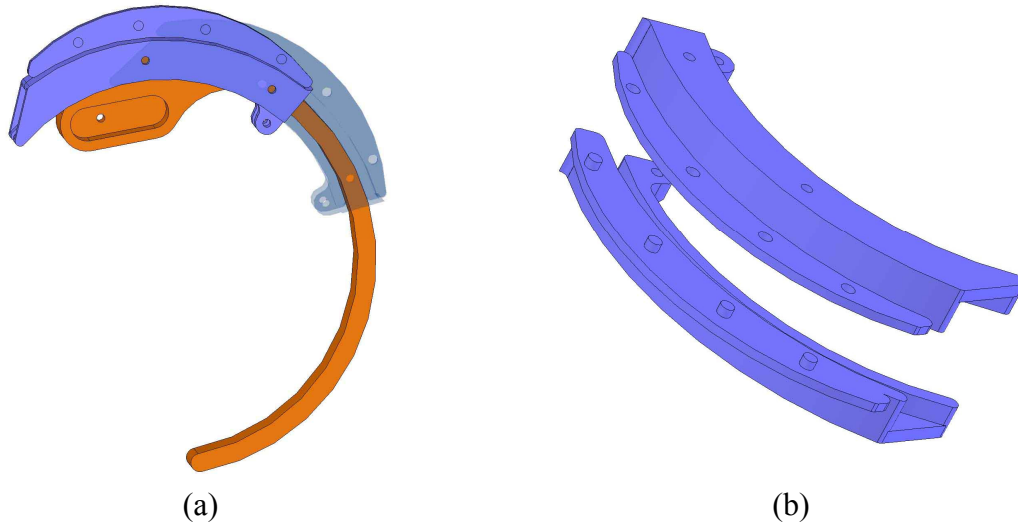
Initial slider design assembly (a) and two piece snap fit design (b).
